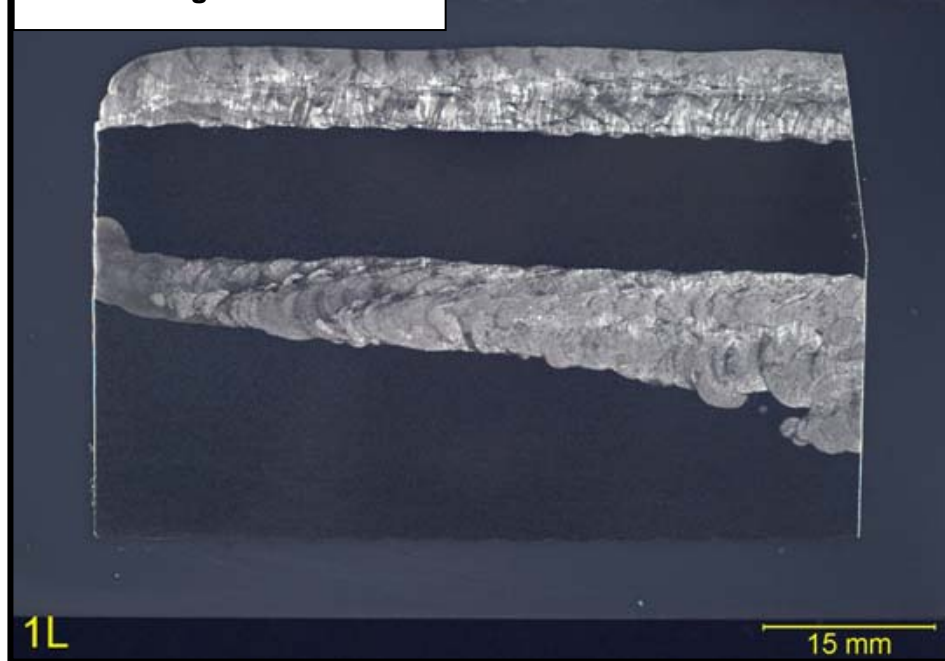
Weld 5 Showing LOF Indication
